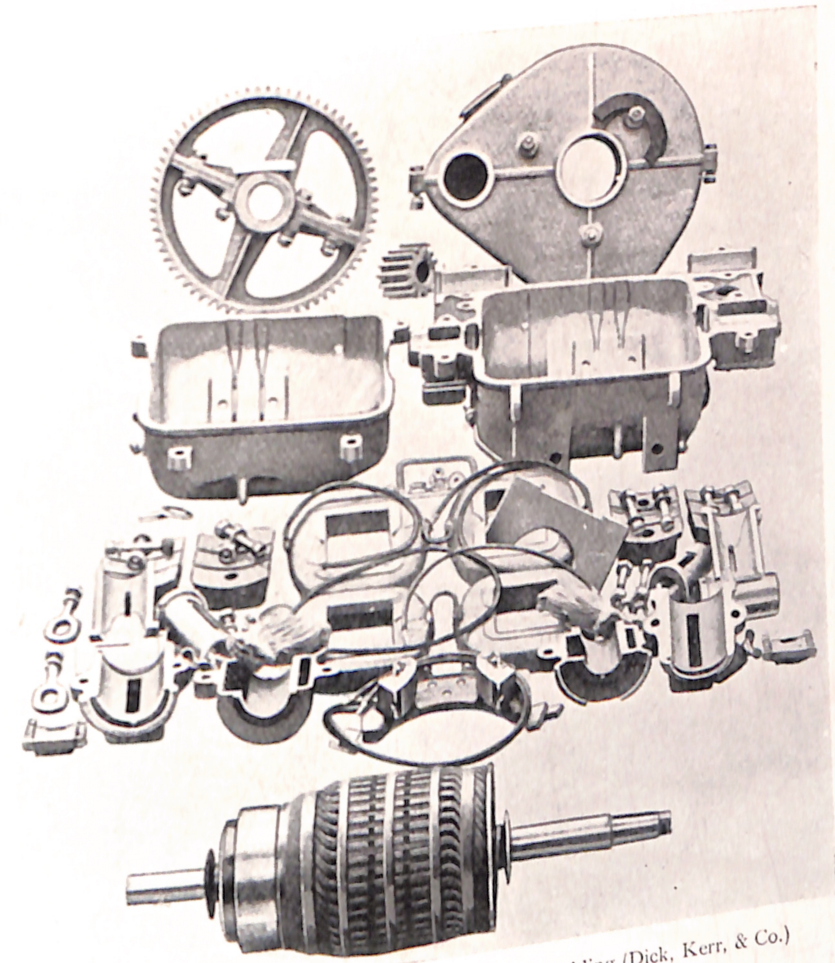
Parts of No. 25 Type A Motor before Assembling (Dick, Kerr, & Co.)
